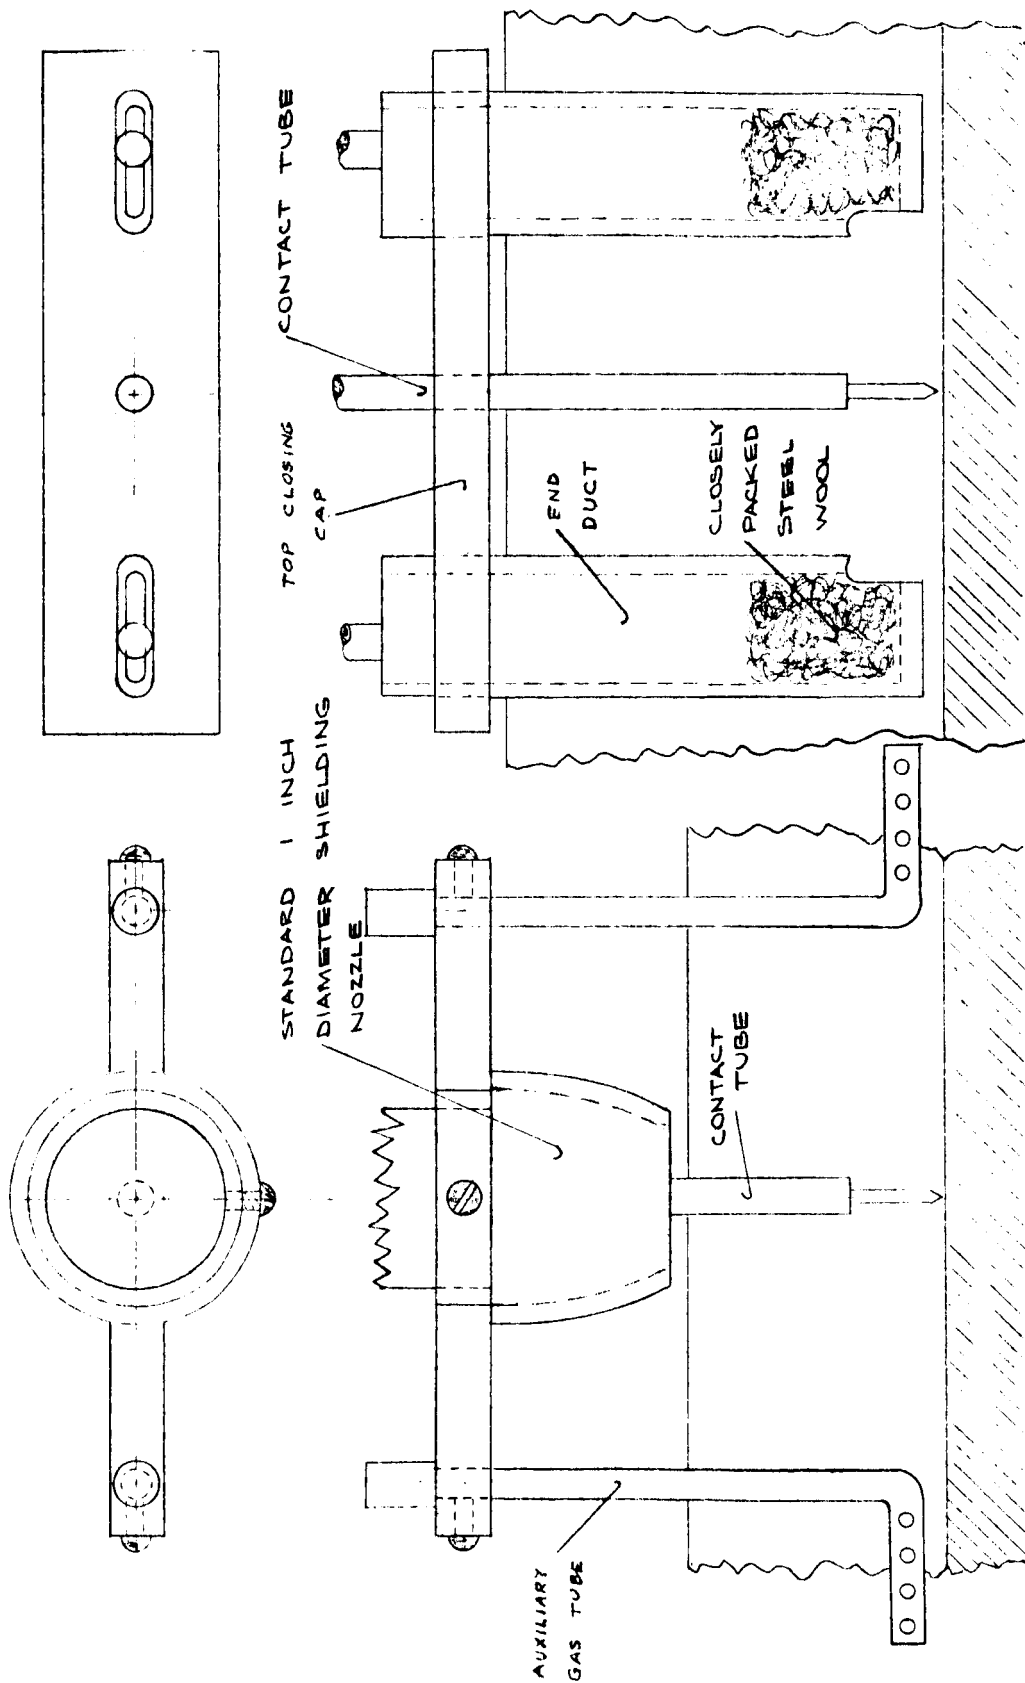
EXPERIMENTAL SHIELDING SETUP A
